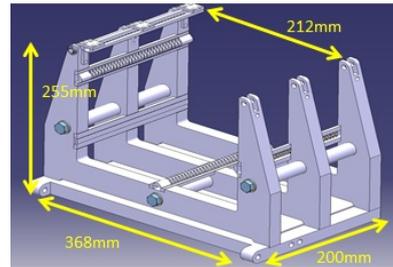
Dimensions of the mechanical frame for the positioning of sensor and absorber planes.
